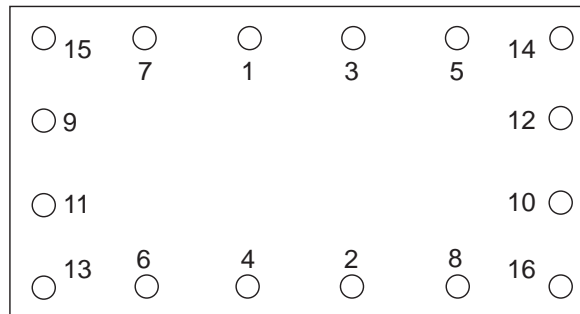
Torquing Pattern for Remote I/O Interface Enclosure
